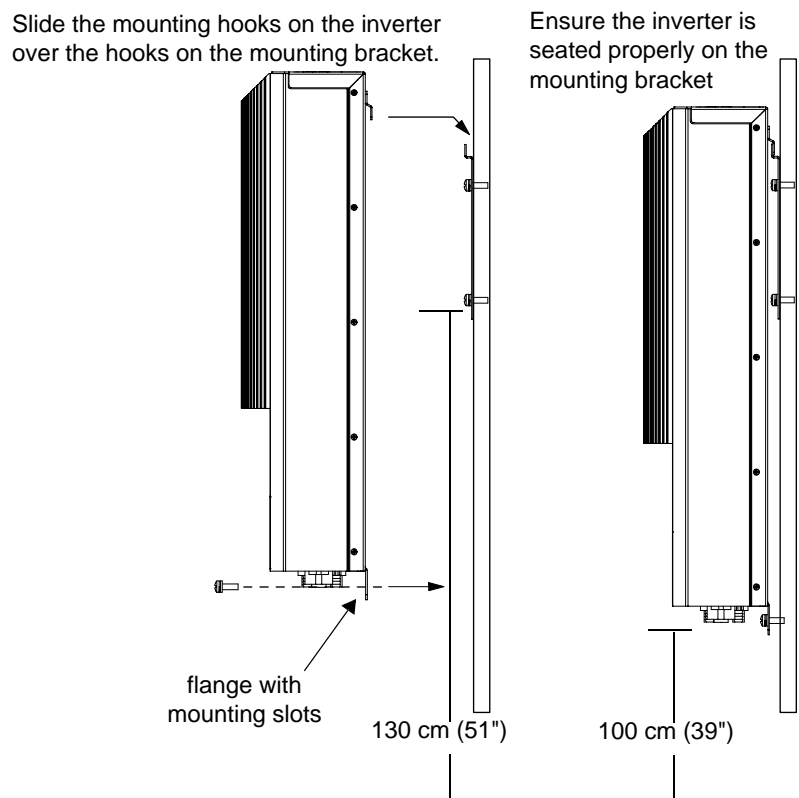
Proper Placement of the Inverter on the Mounting Bracket
